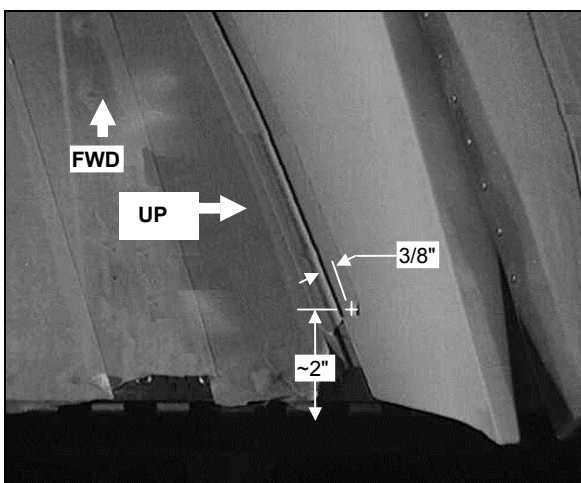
shows the location of the third and final mounting screw hole on each side of the fairing. Mark this location 3/8" inboard of the lower edge of the fairing and about 2" forward of the trailing edge of the stabilizer. Drill through the fairing and the upper surface of the stabilizer skin at each mark with a #19 bit.
